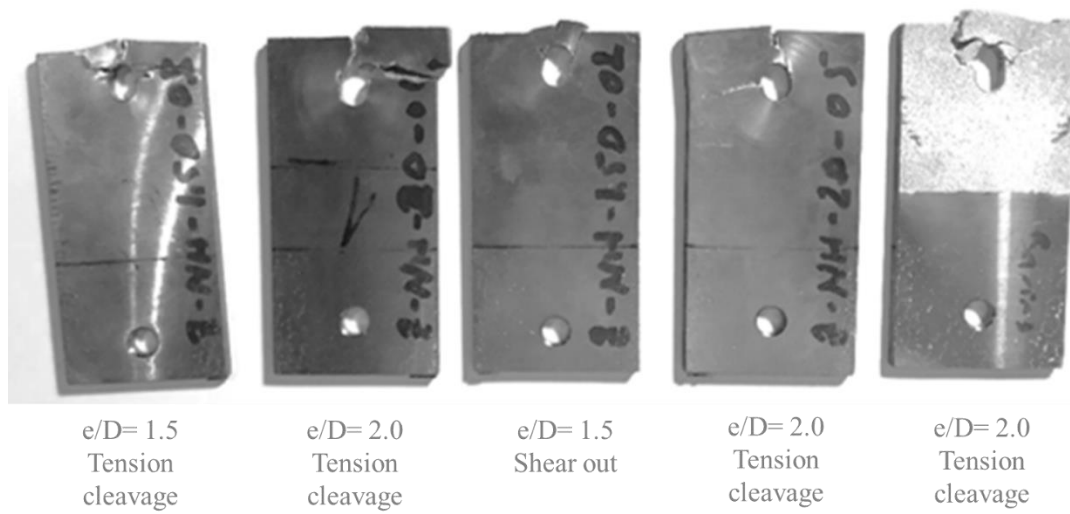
As built L build direction pin-bearing test specimens after fracture.
